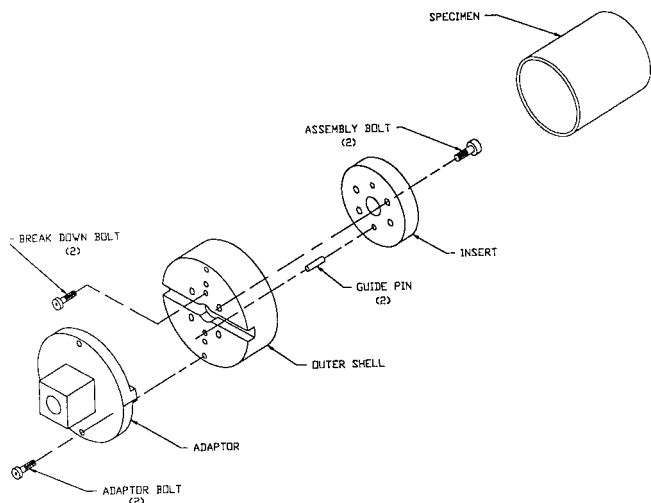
Assembly Drawing for the Shear Fixture and Specimen
